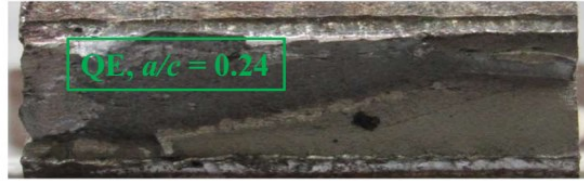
Fracture surfaces for HFMI treated 350W steel specimens under VA1 loading
